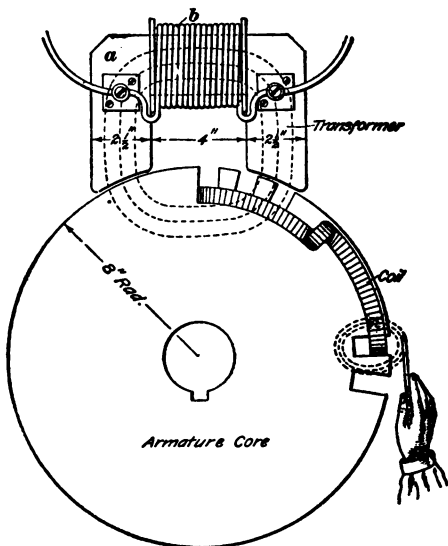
ARMATURE-COIL TESTING TRANSFORMER
